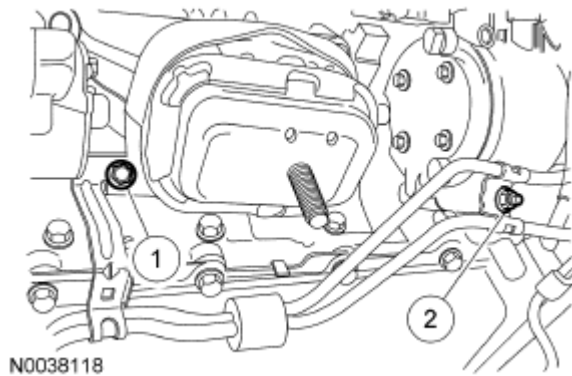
Identifying Transmission Cooler Tubes Mounting Nuts
